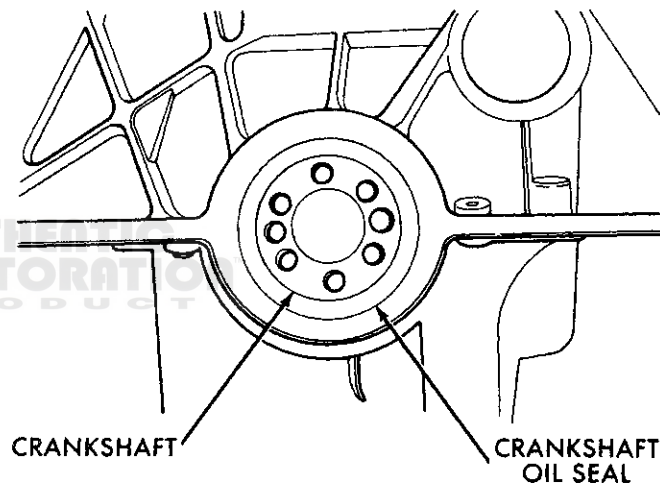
Replacement of Rear Crankshaft Oil Seal
